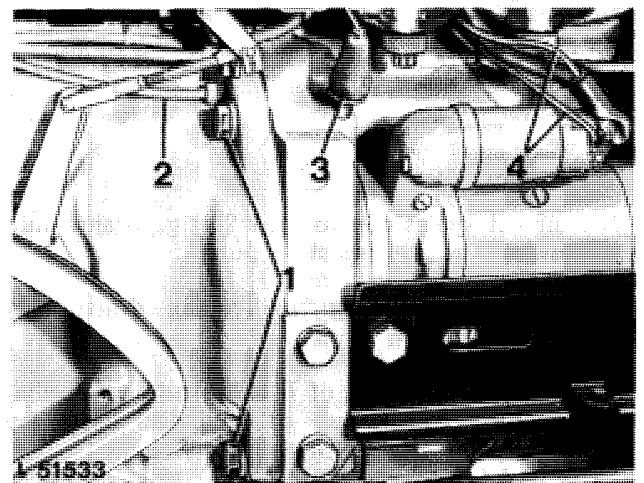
Separating between Engine and Clutch Housing, R.H. Side
